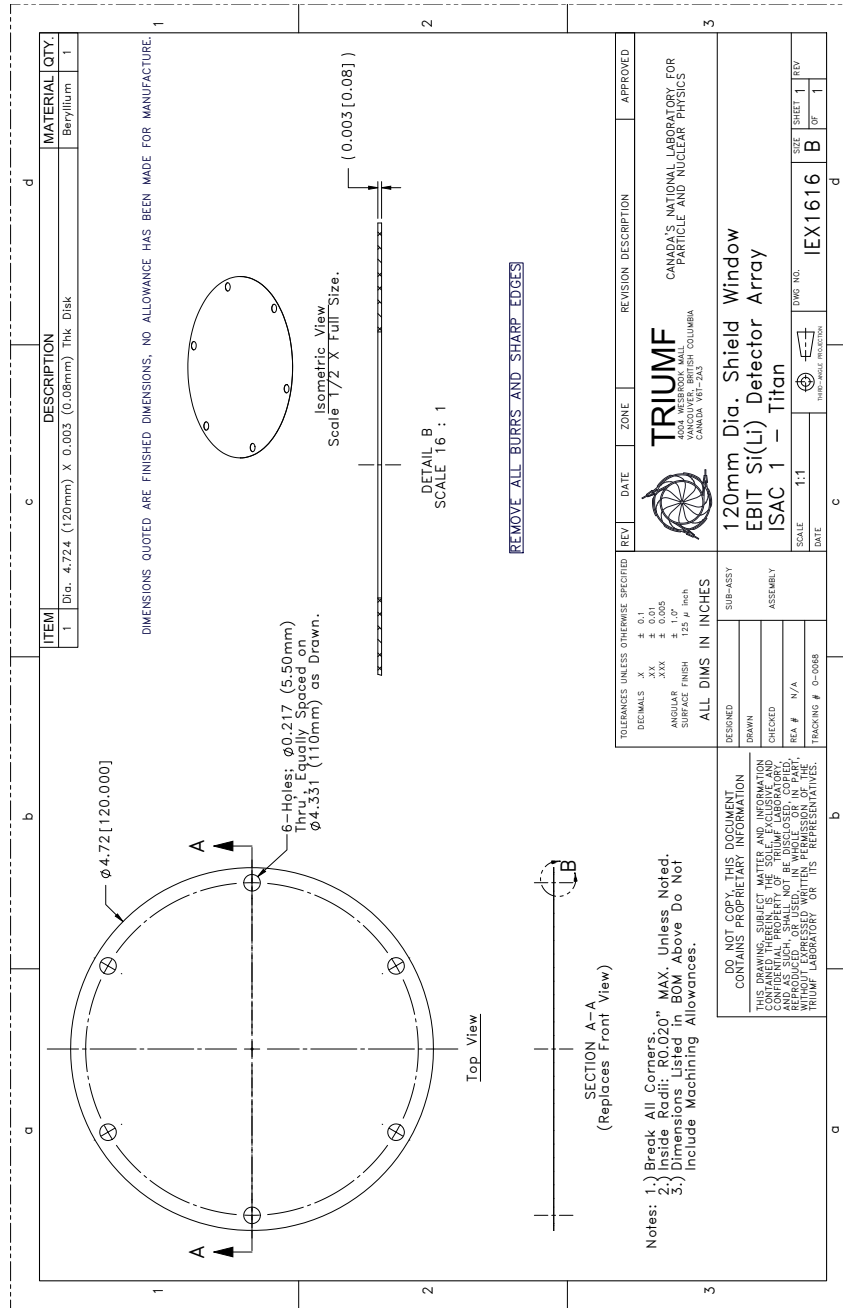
Technical drawing of the 120 mm diameter heat shield window [172].
